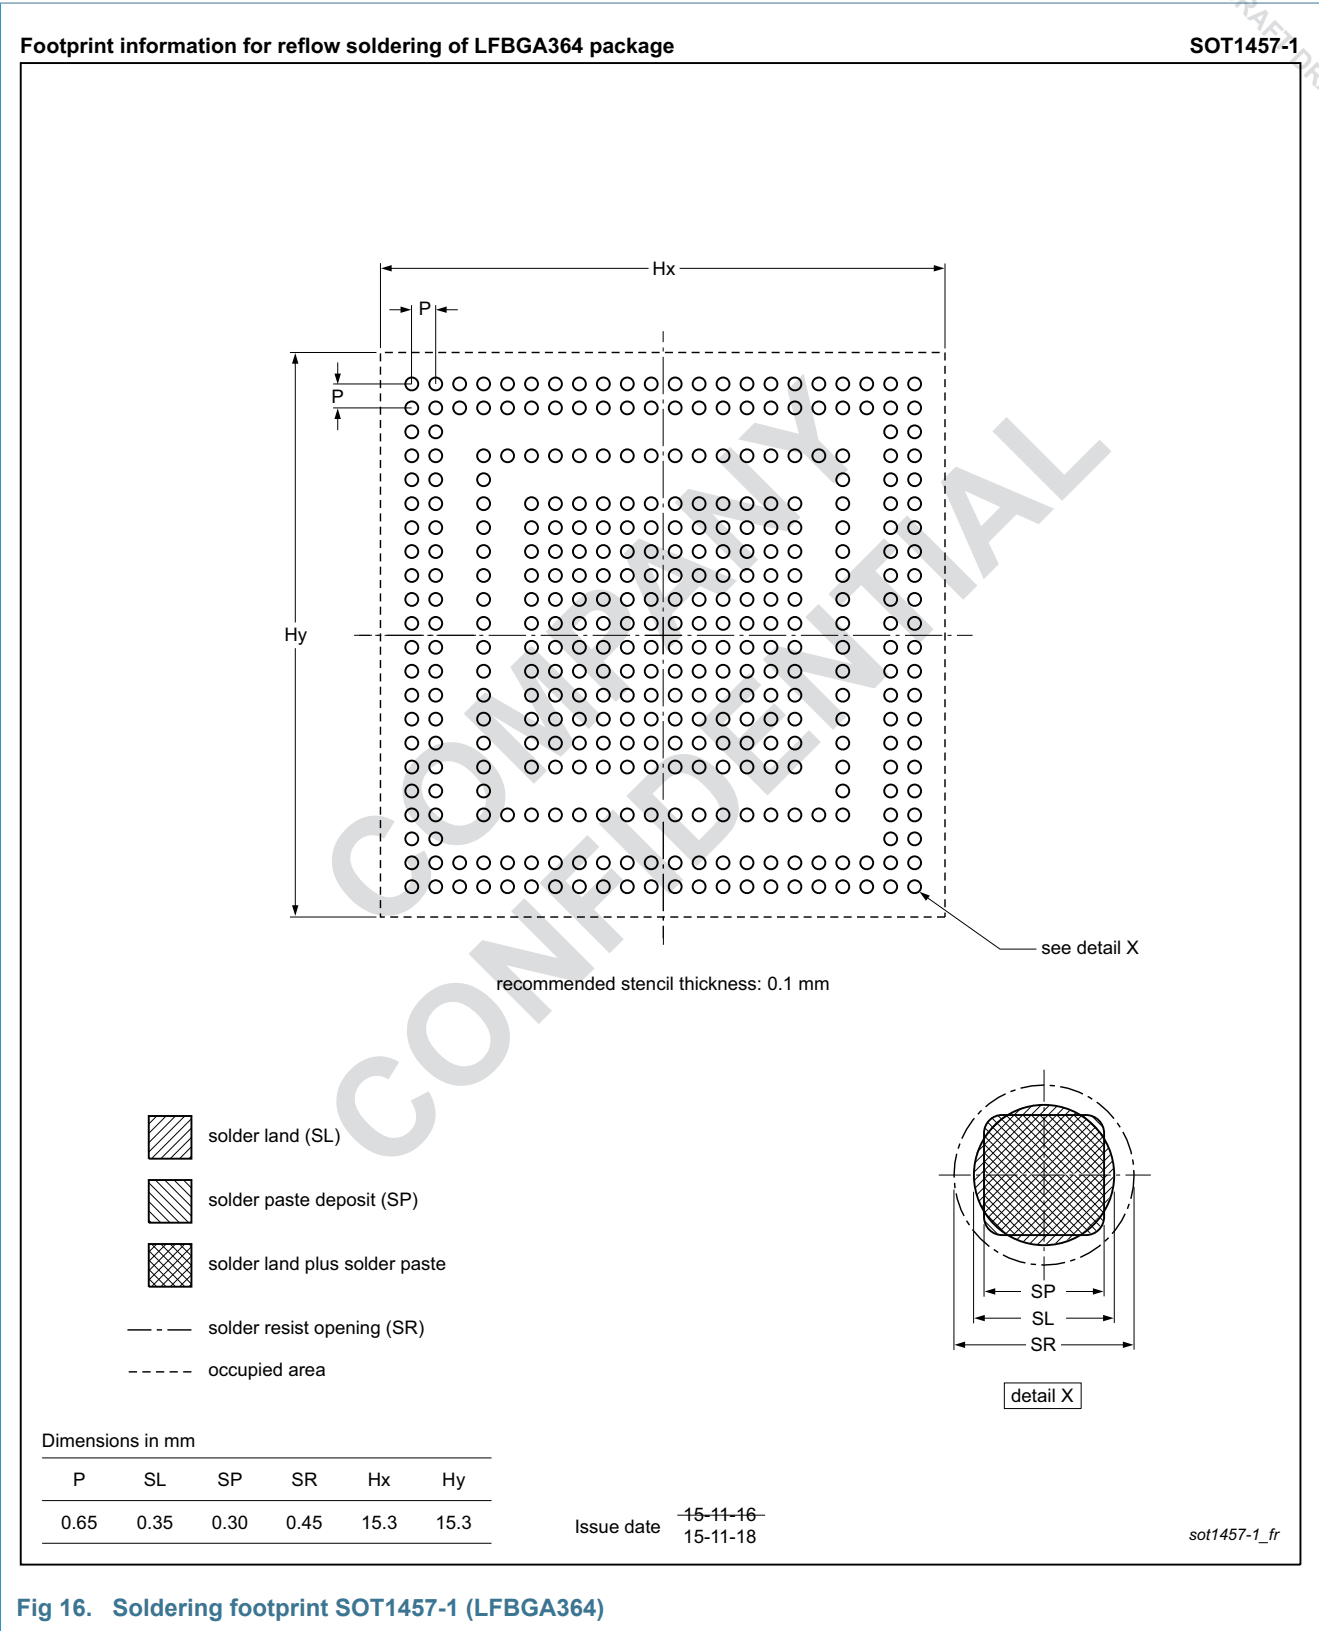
Soldering footprint SOT1457-1 (LFBGA364)
